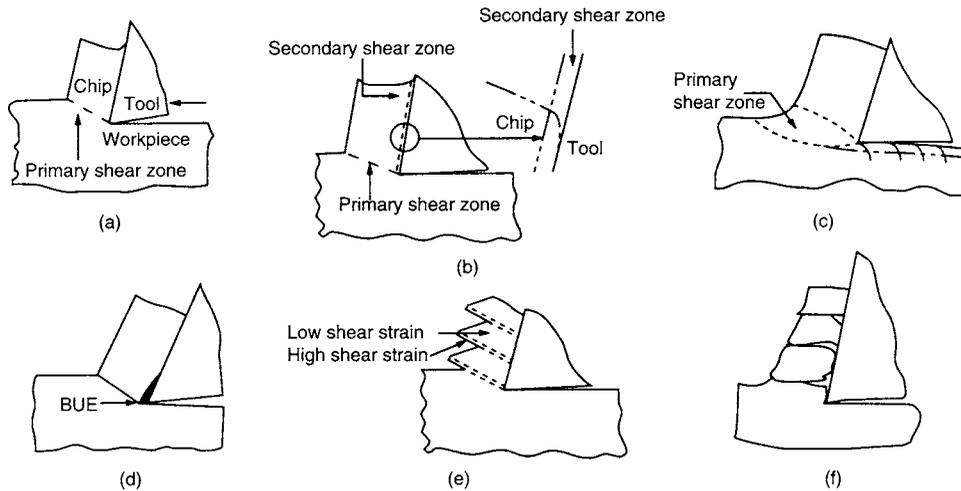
Basic types of chips produced in metal cutting: (a) continuous chip with narrow, straight primary shear zone; (b) secondary shear zone at the tool-chip interface; (c) continuous chip with large primary shear zone; (d) continuous chip with built-up edge; (e) segmented or nonhomogeneous chip; (f) discontinuous chip. (Source: After M. C. Shaw.)
